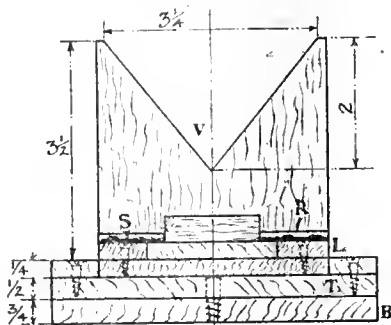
End elevation of lens carrier, sliding V-piece, turntable and baseboard.
